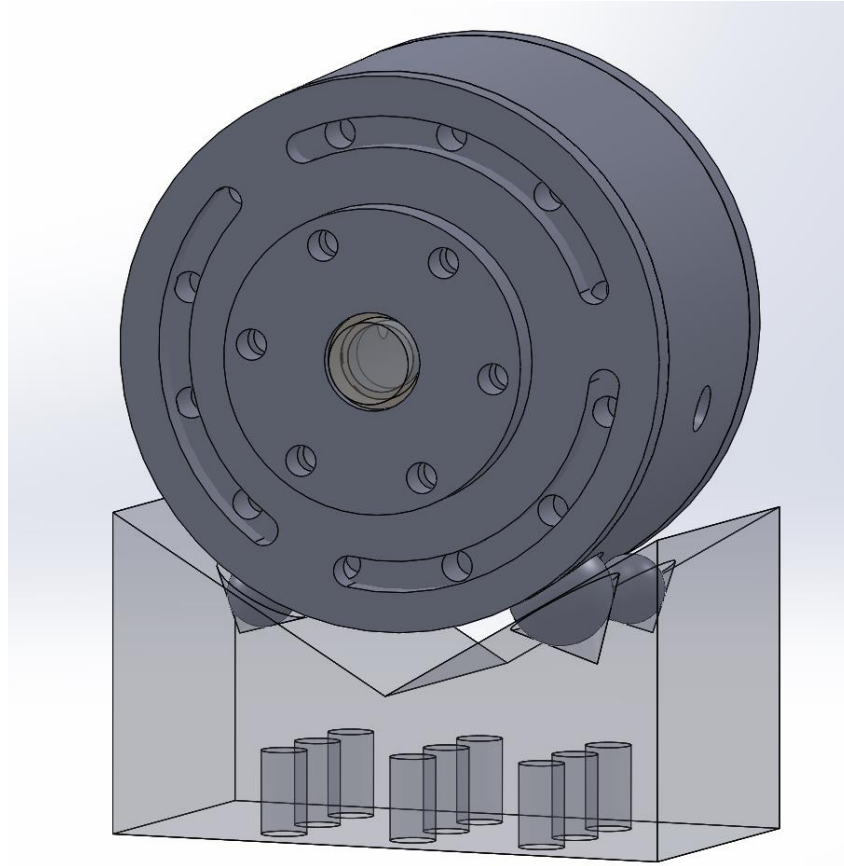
CAD drawing showing the filter cavity sitting on its kinematic mount.
